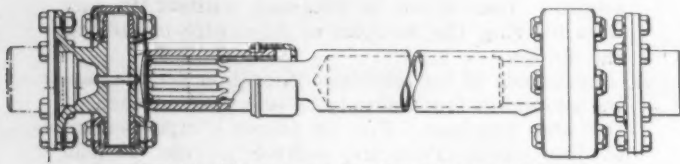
MECHANICS OIL-LUBRICATED JOINT
